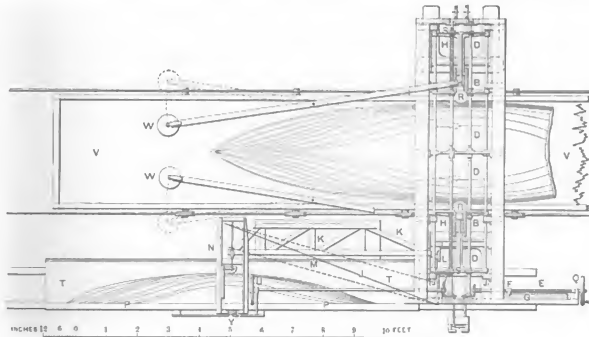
PLAN OF SHIP MODEL SHAPING MACHINE.
